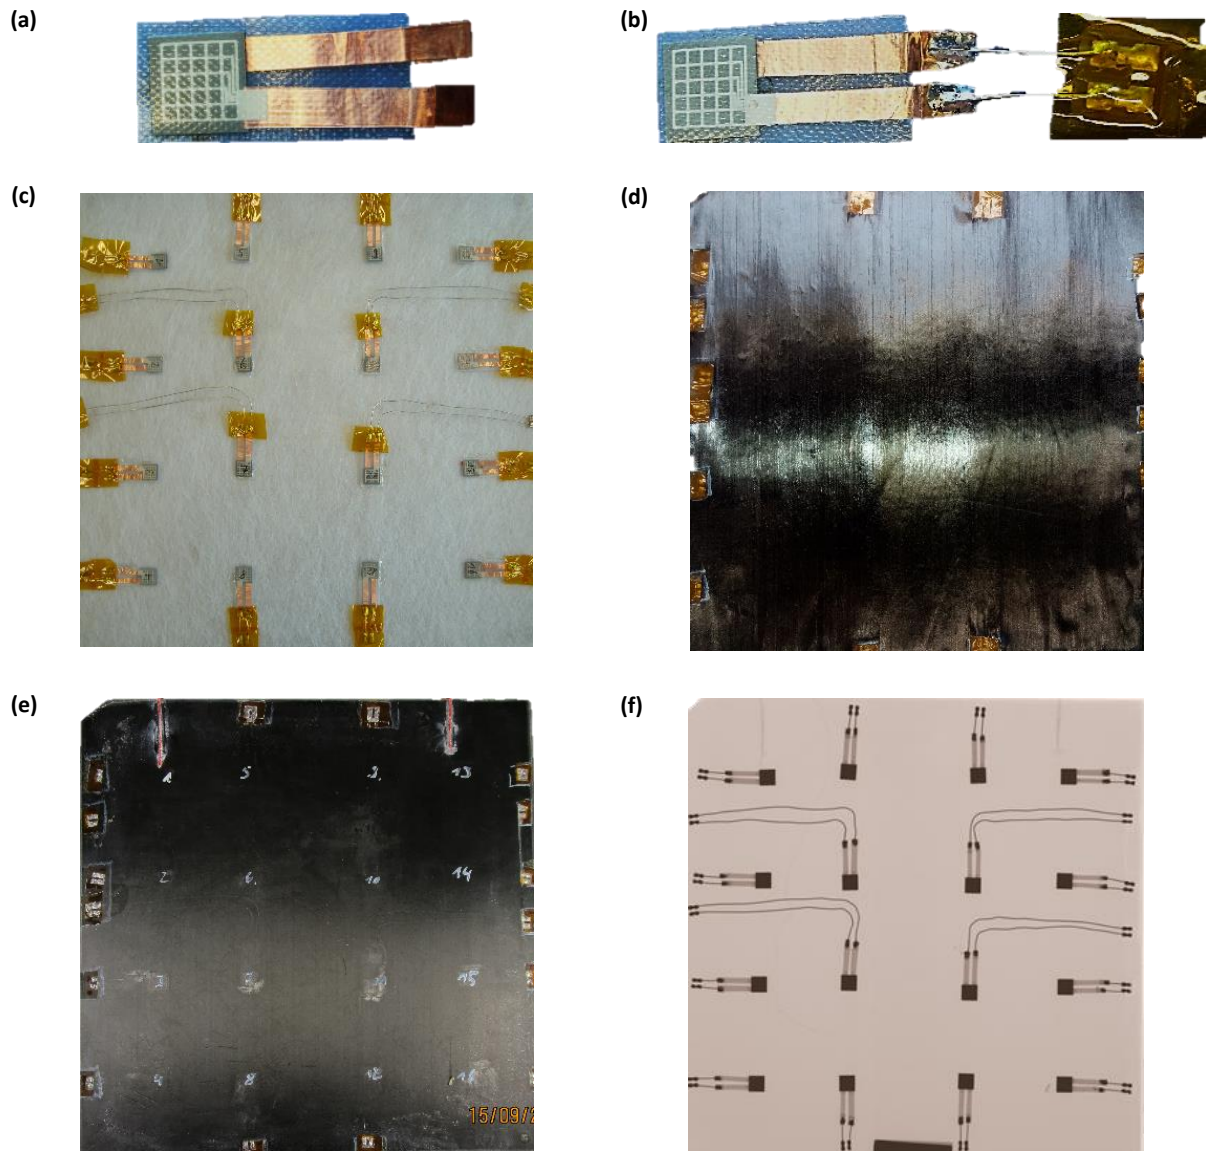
Steps of CFRP panel specimen manufacturing with integrated sensor elements: sensor preparation (a and b); sensor positioning and integration (c); pre-preg stacking (d); consolidated panel specimen (e); computed tomography scan (f).
